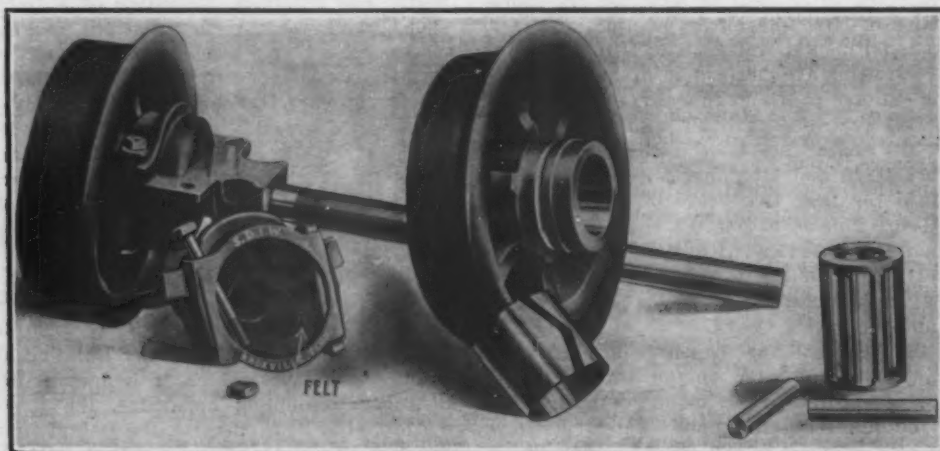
Axle with One Wheel in Place and the Other Unassembled.
